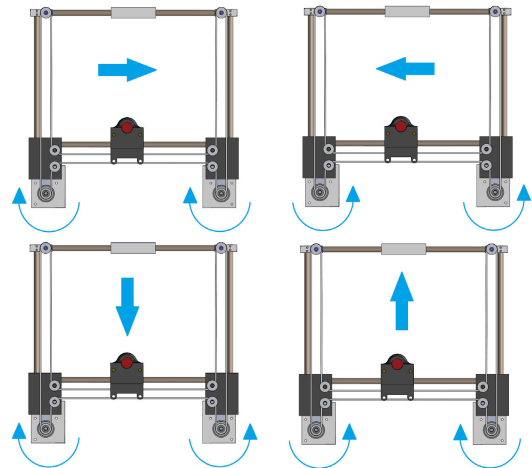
H-belt drive is applied for scan mechanism. The moving of probe is combined between two stepper motors. The mechanism is light and simple, which help reduce robot's weight.
